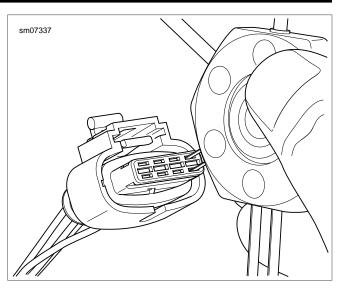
Terminal Removal: Bosch Compact 1.1M Connector
